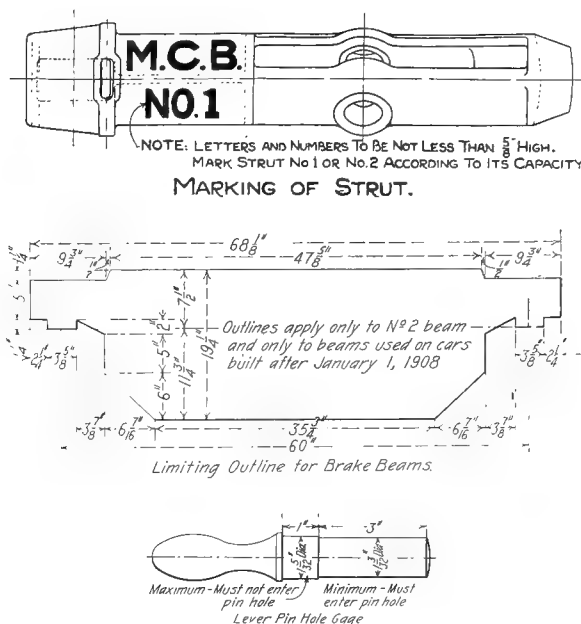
M. C. B. Standard Limiting Outline for Brake Beams and Standard Brake Lever Pin Hole Gage. Also Diagram Showing Marking of Strut. (M. C. B. Sheet 17A.)
